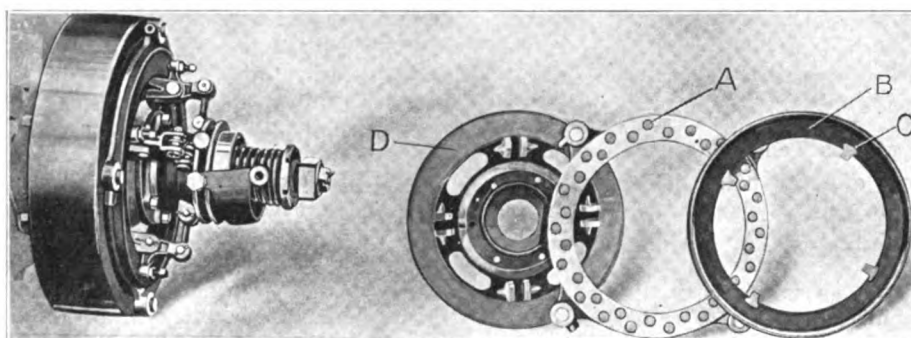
THREE-PLATE CLUTCH USED ON VELIE CARS
